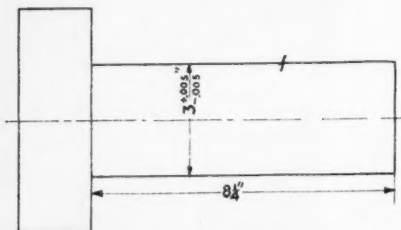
Drawing of solid casting for which cutting time is to be determined.
